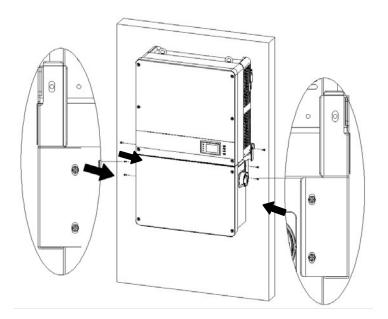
Secure the Main Enclosure and Wiring Box to the Bracket
